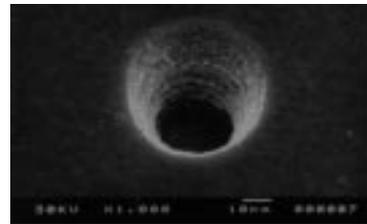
A 50 μ m blind via hole in an epoxy-resin PCB.
